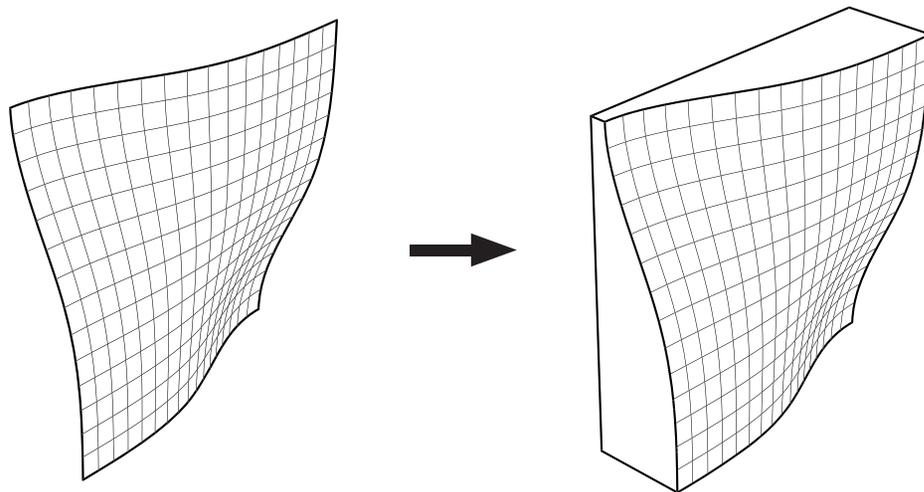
Manufacturing process via [m]form: CAD & final mold.
